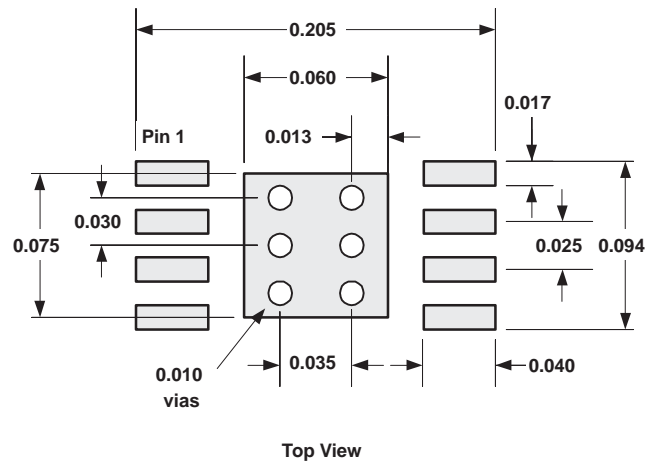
DGN PowerPAD PCB Etch and Via Pattern
